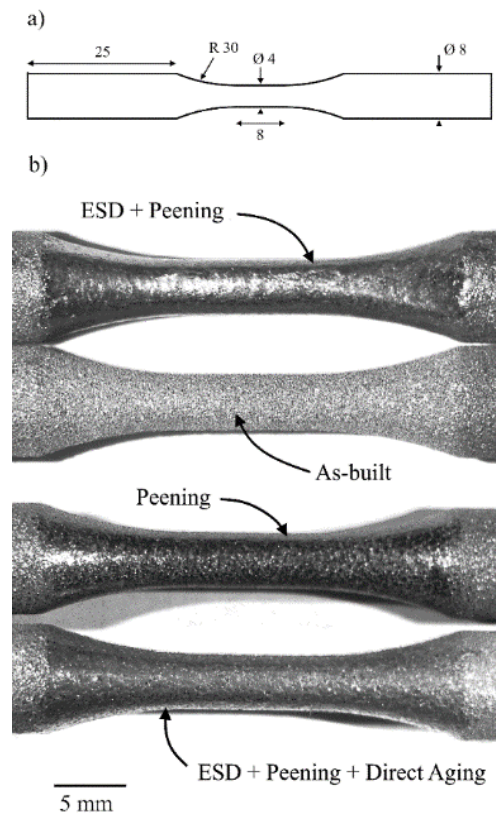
a) Fatigue testing specimen dimensions in mm and b) samples in the as-built and post-processed conditions
